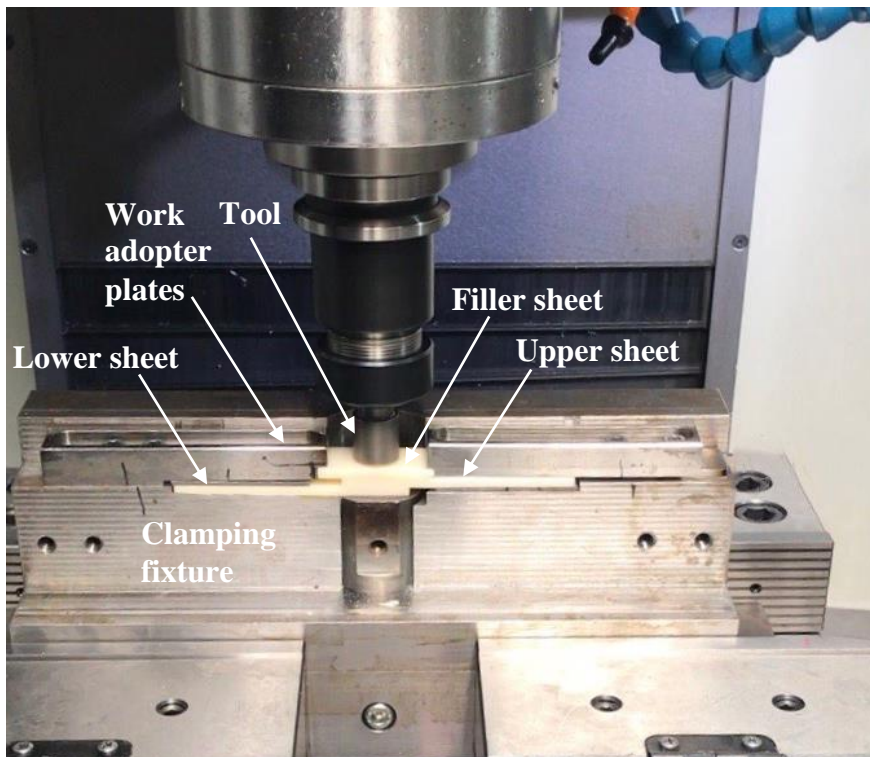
Welding positions of clamping apparatus, FSSW tool, and welding sheets for ABS-ABS joints.
